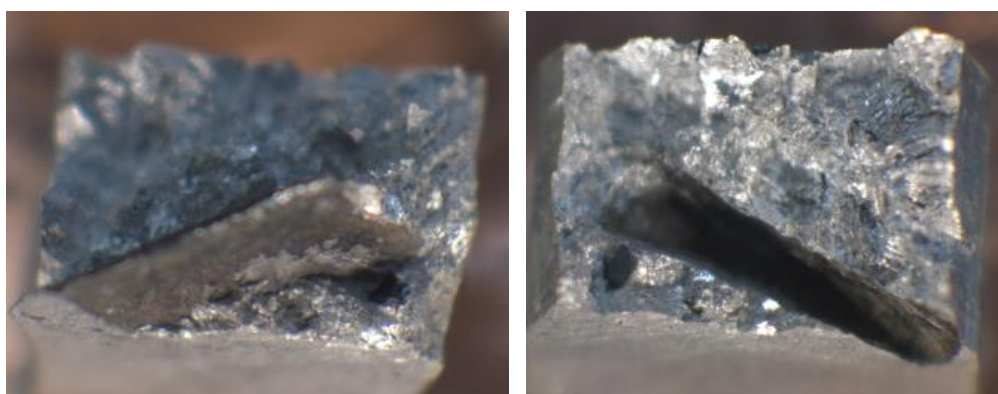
Fracture surface of a Mg-Y tensile test bar produced under a cover gas of 0.5%SF₆/air. The dimensions of the fracture surface are 5 mm × 6 mm.
